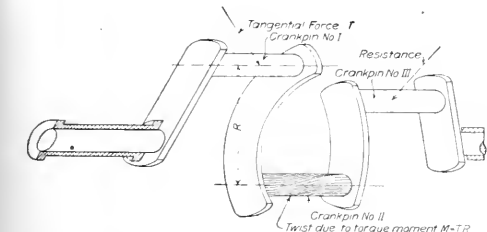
PART OF CRANKSHAFT ILLUSTRATING TORQUE IN CRANK-PIN IN CASE OF THREE- AND FOUR-BEARING SIX-THROW CRANKSHAFTS
